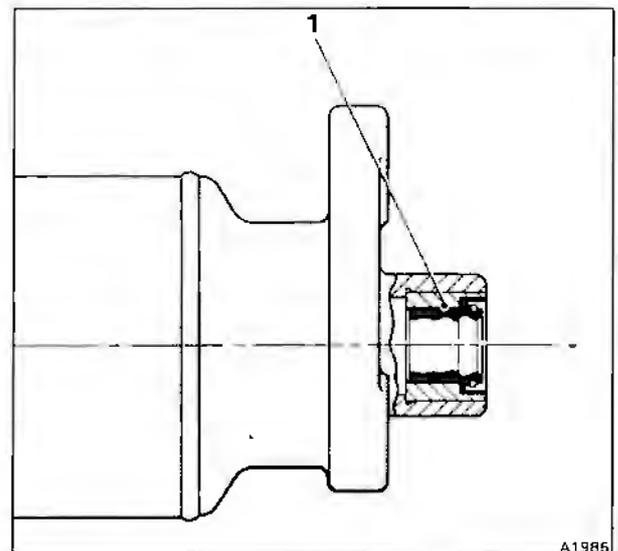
Propeller shaft, centring bush/lip seal assembly (Flexible coupling)
